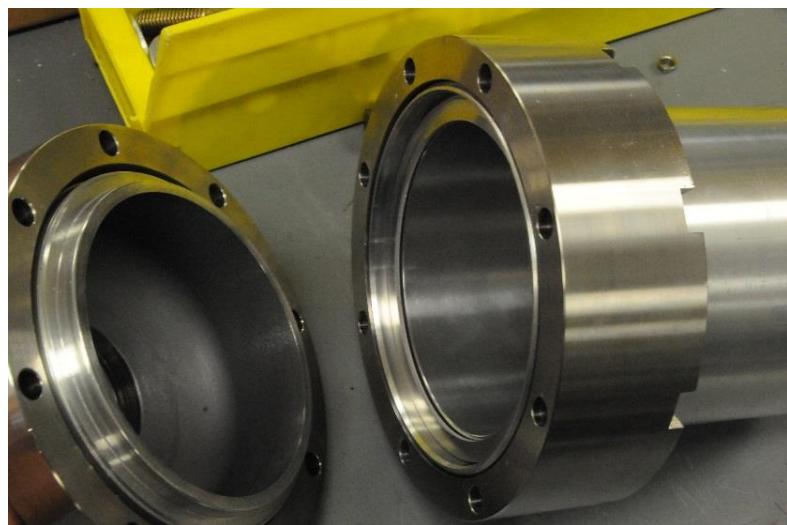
2-piece clamp assembly (disassembled)
